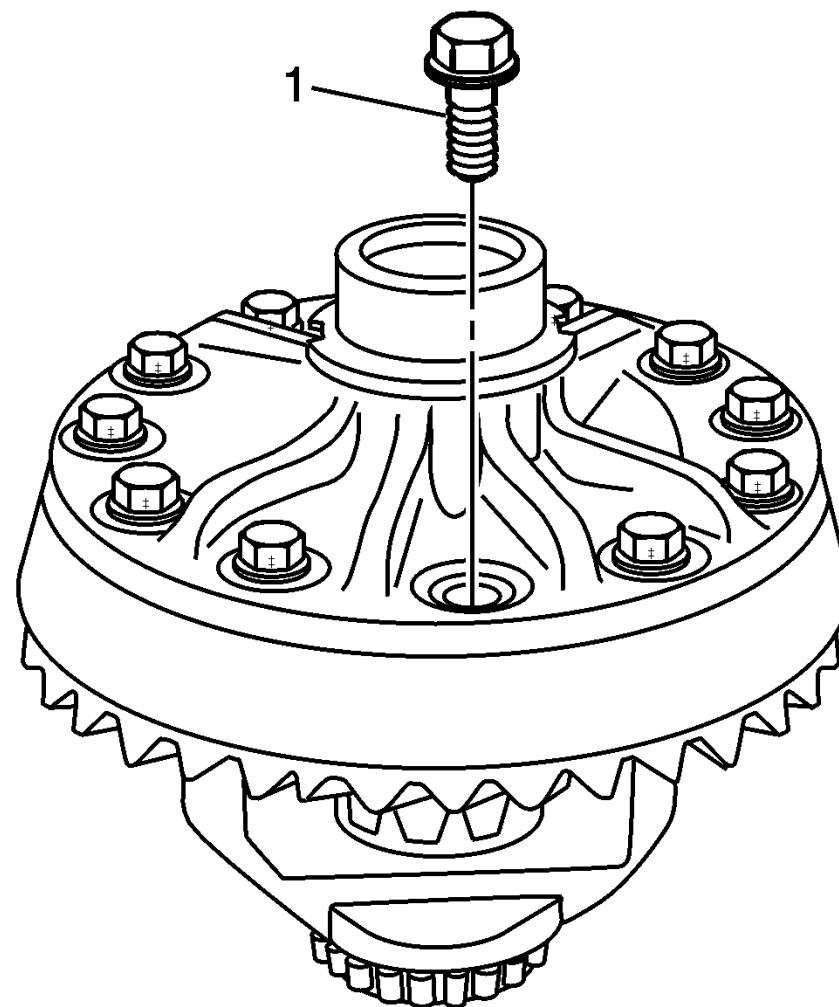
Ring Gear Bolts Have Left-Hand Threads
